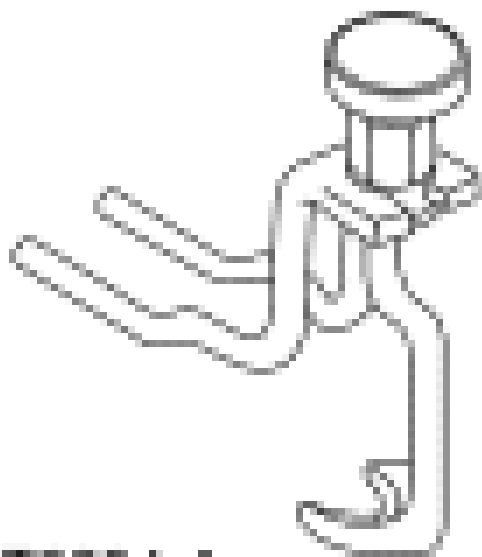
Locating Camshaft Phaser And Sprocket Assembly Bolt
